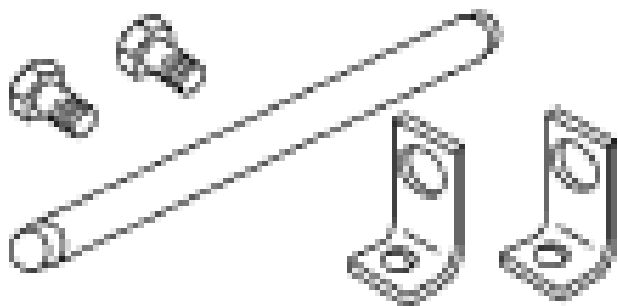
Identifying Special Tools (303-300, 303-350, 303-472)
